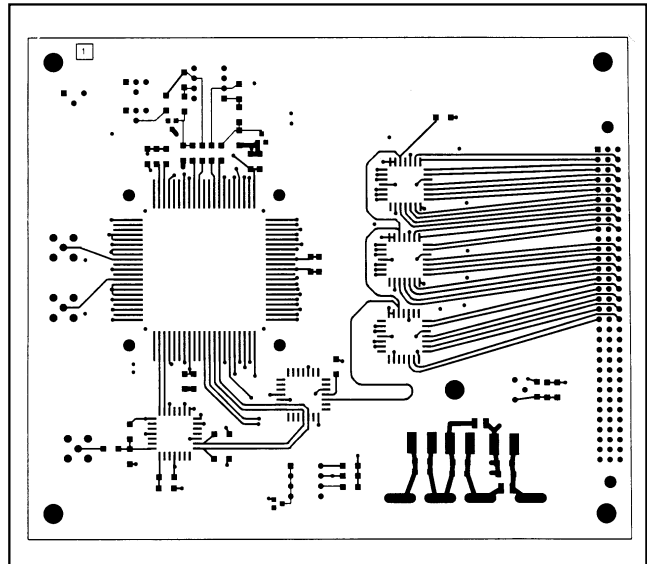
Main Board Layout—Copper Layer 1 (Top)
